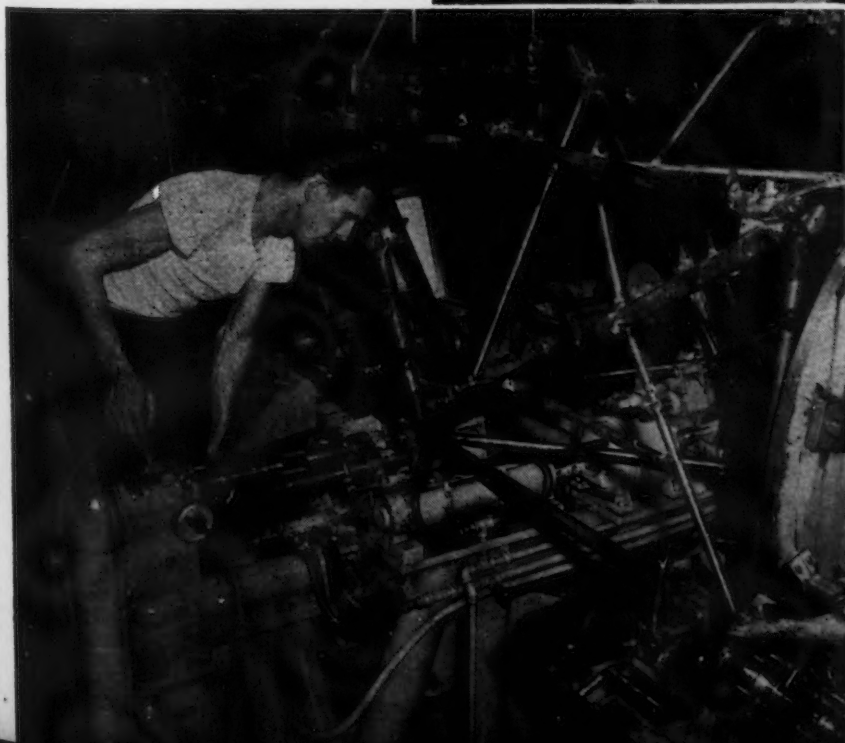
Setting tool for drilling engine mount forging at front end of frame. A standard drill head drives the tool turret.
